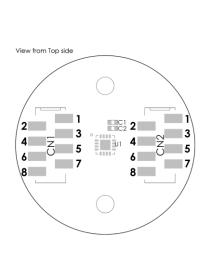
LT Type 2 Mechanical Drawing, mil = 0.001" = 0.0254mm
